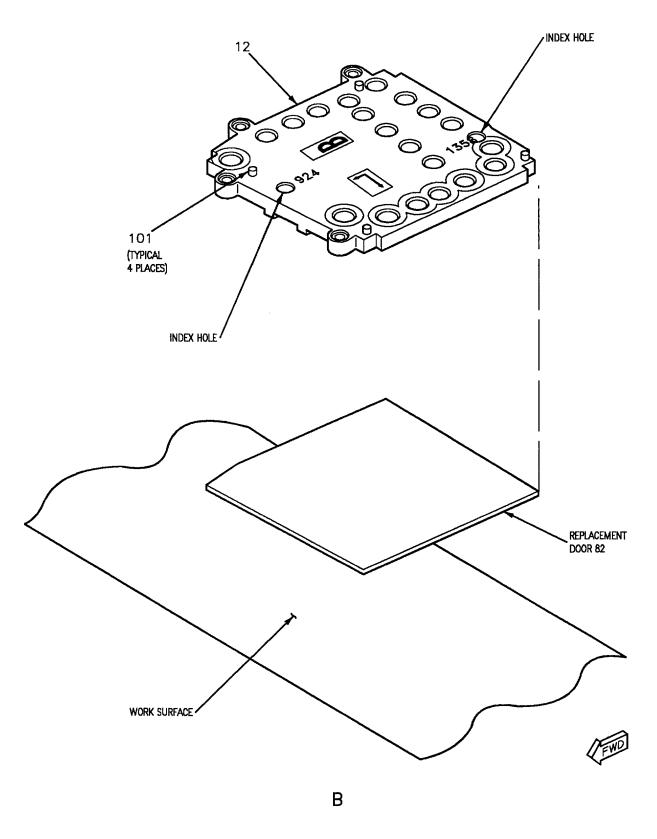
Installation of Plate Set for Drilling Door 82 (Sheet 2)
